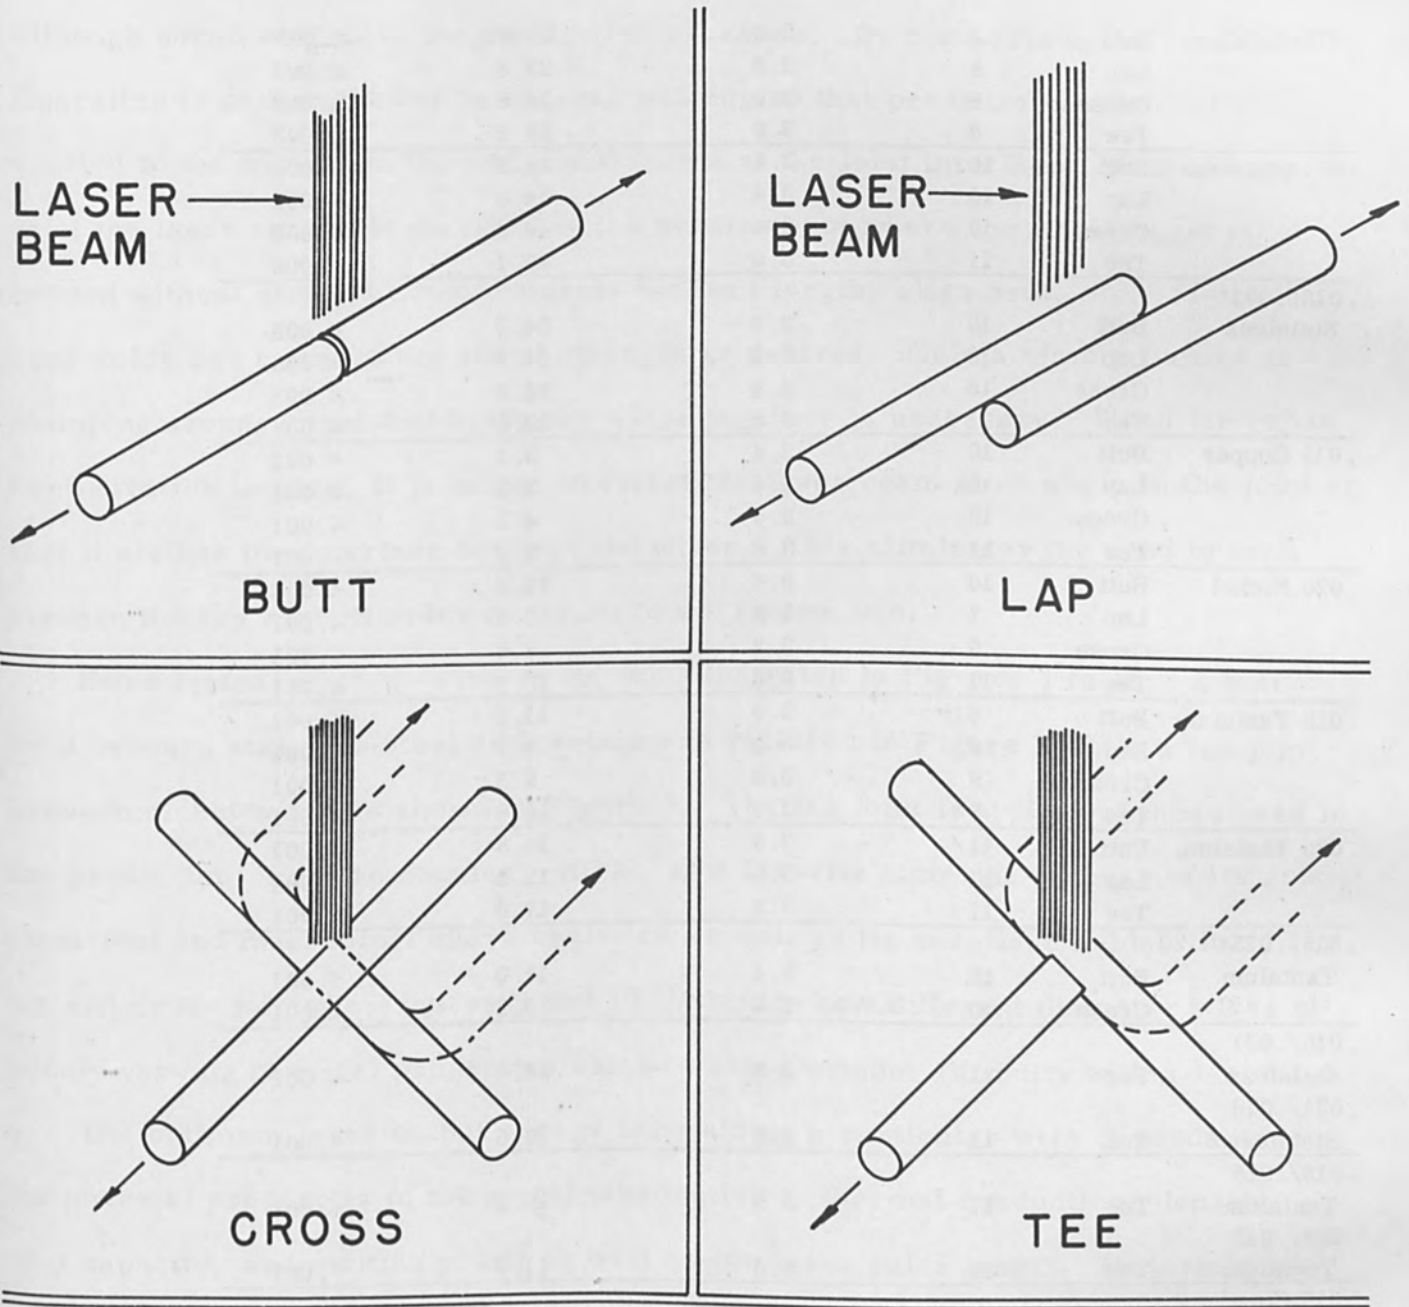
Basic configurations for wire-to-wire laser spot welds.
